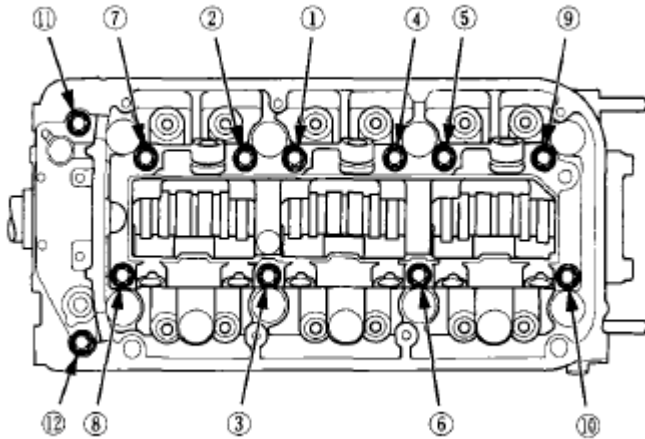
Identifying Rocker Shaft Holder-To-Front Cylinder Head Bolts With Tightening Sequence
